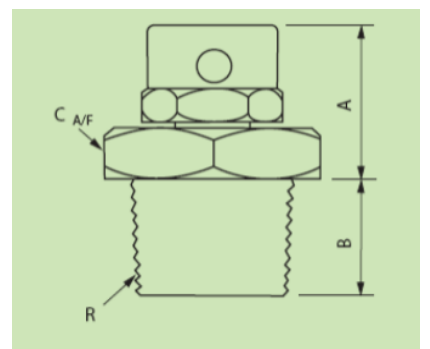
H fusible plugs should be fitted on the underside of the pipe between the compressor and the receiver, as close as possible to the compressor. The DN10 size should be used for pipe bores up to DN50 and the DN15 size for larger bores. Fig 22 Fusible Plugs are normally fitted on the top of the vessel being protected.
